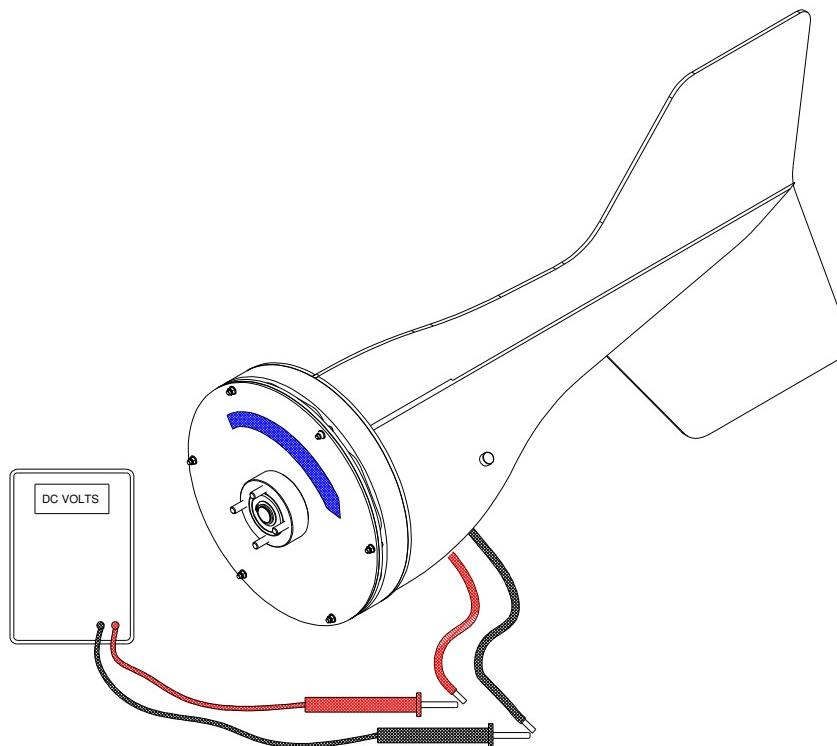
Checking Magnet Rotor rotation and Coil-disc continuity
